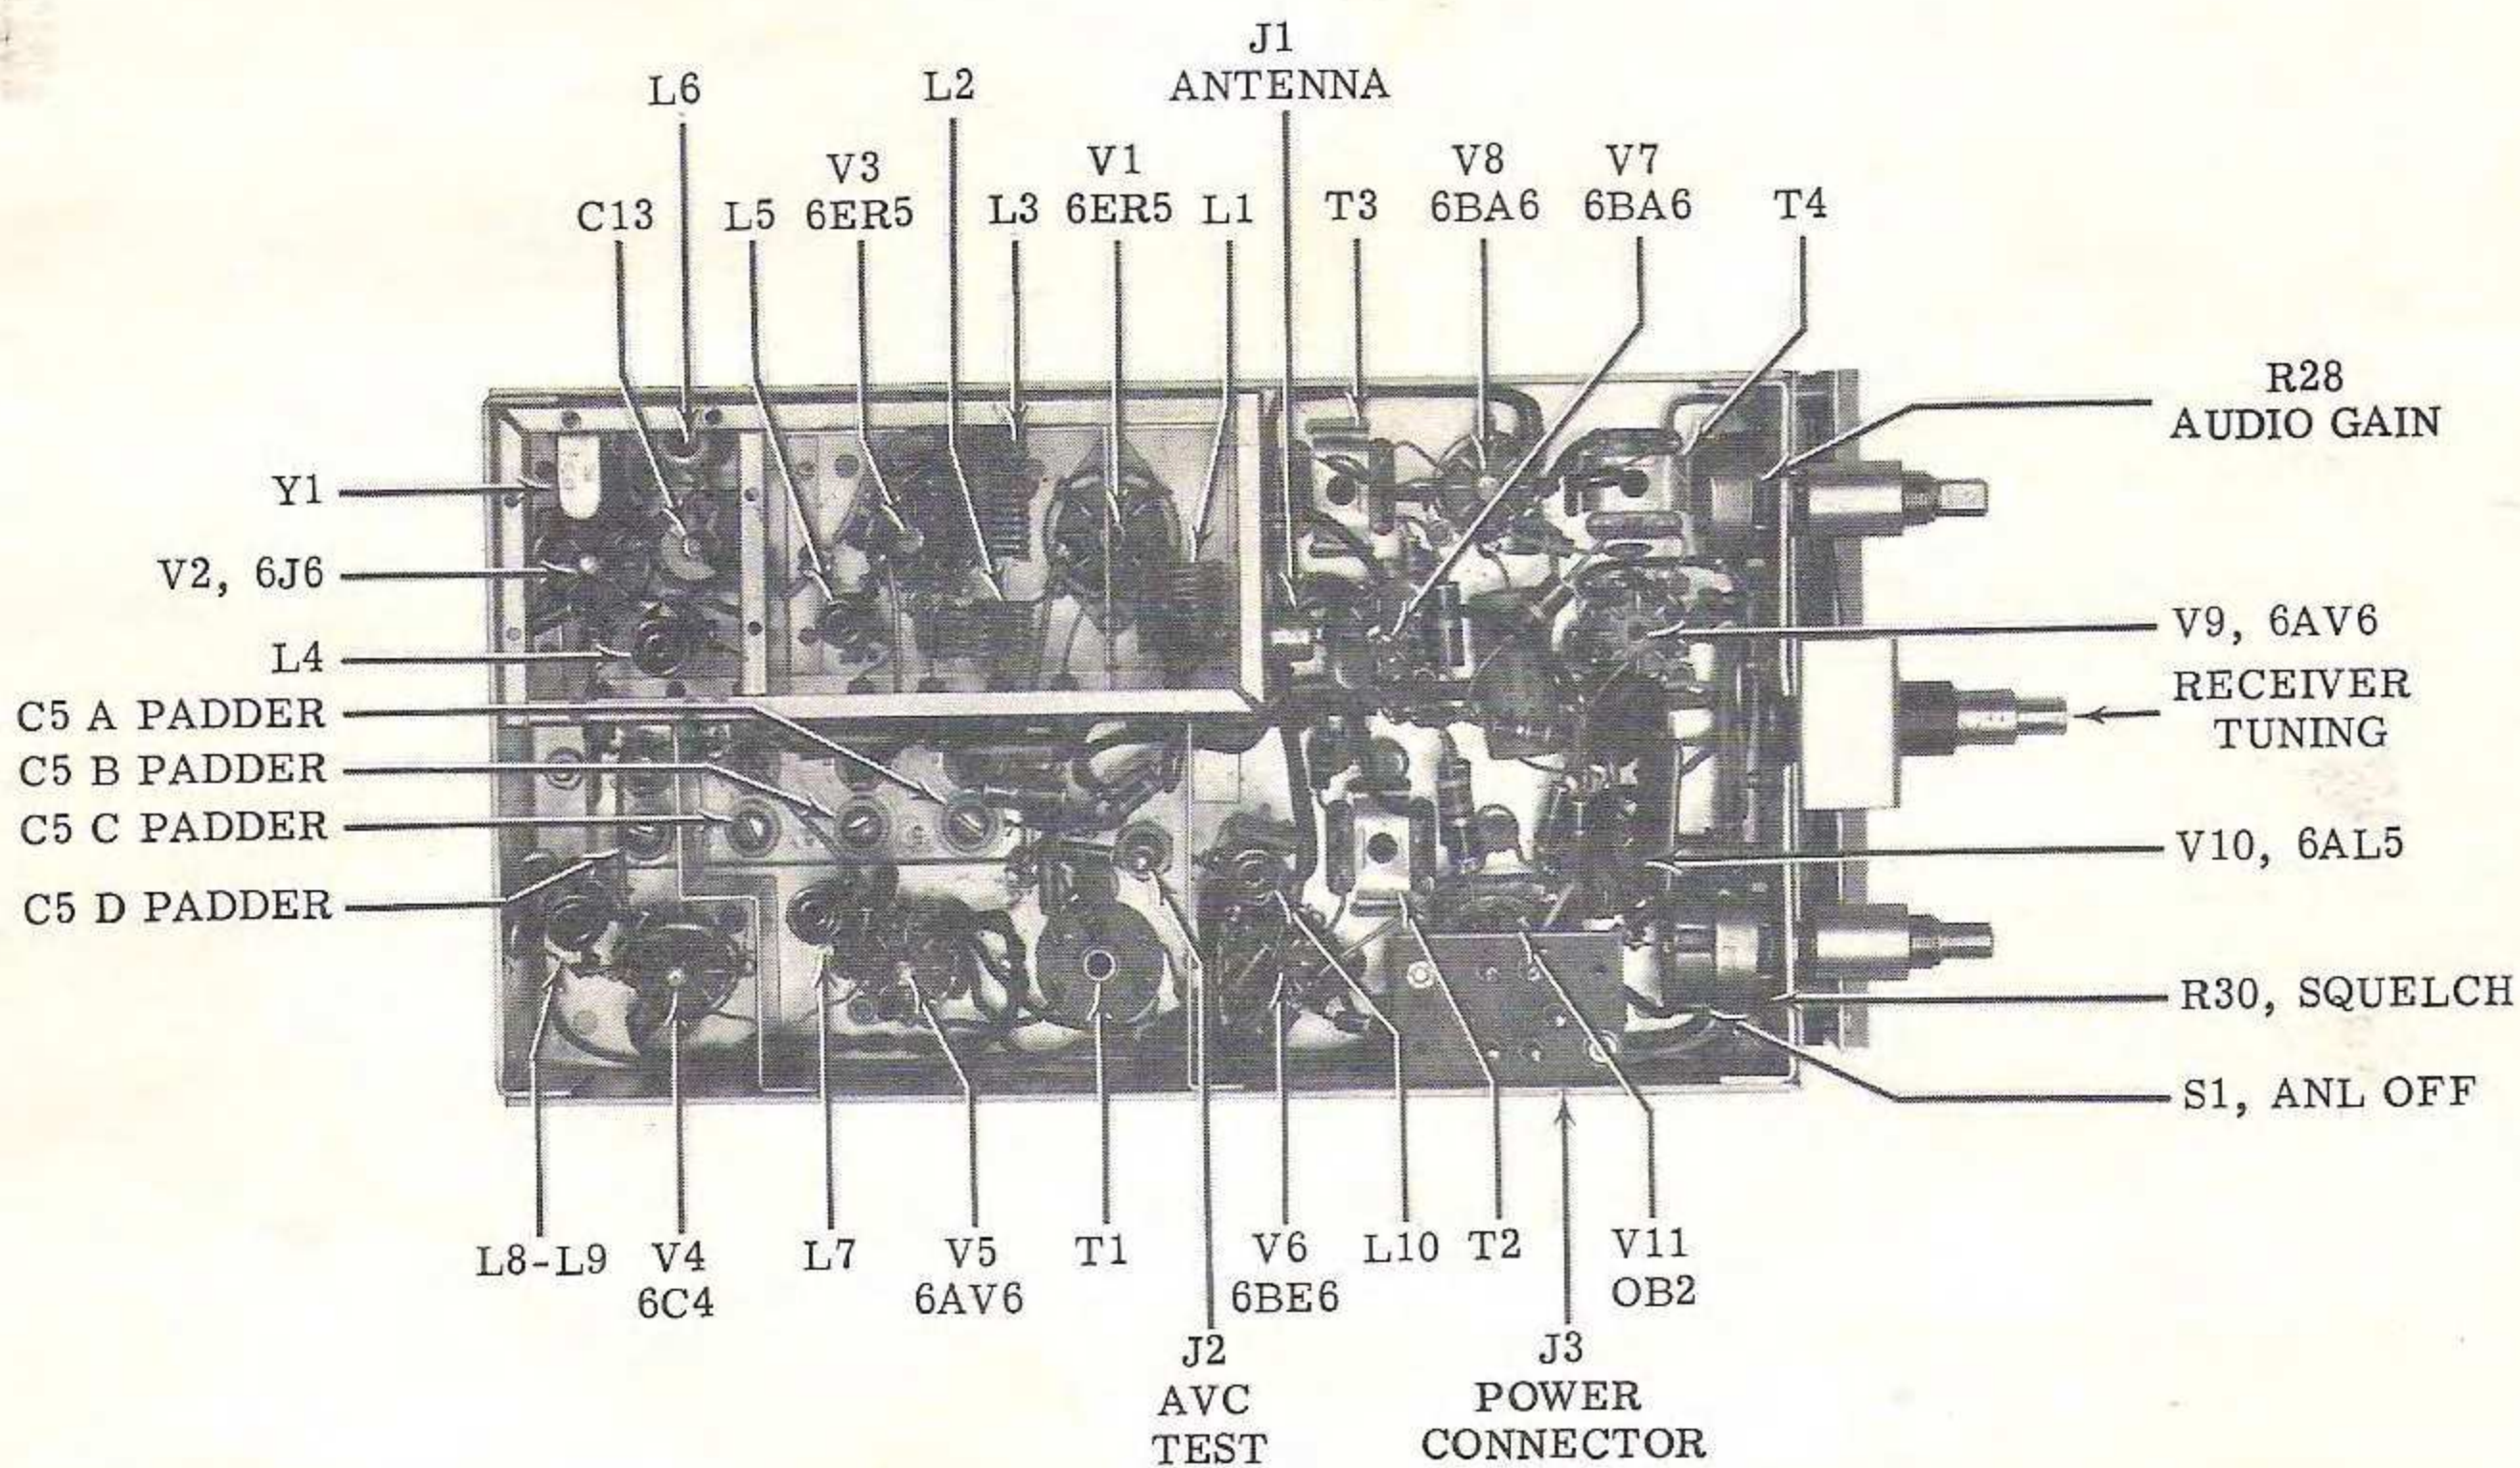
, RECEIVER SUB CHASSIS, BOTTOM VIEW
